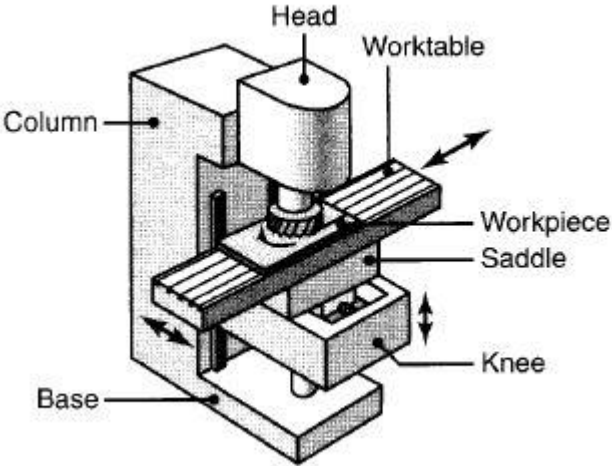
Vertical-spindle column-and-knee-type milling machine [8]
